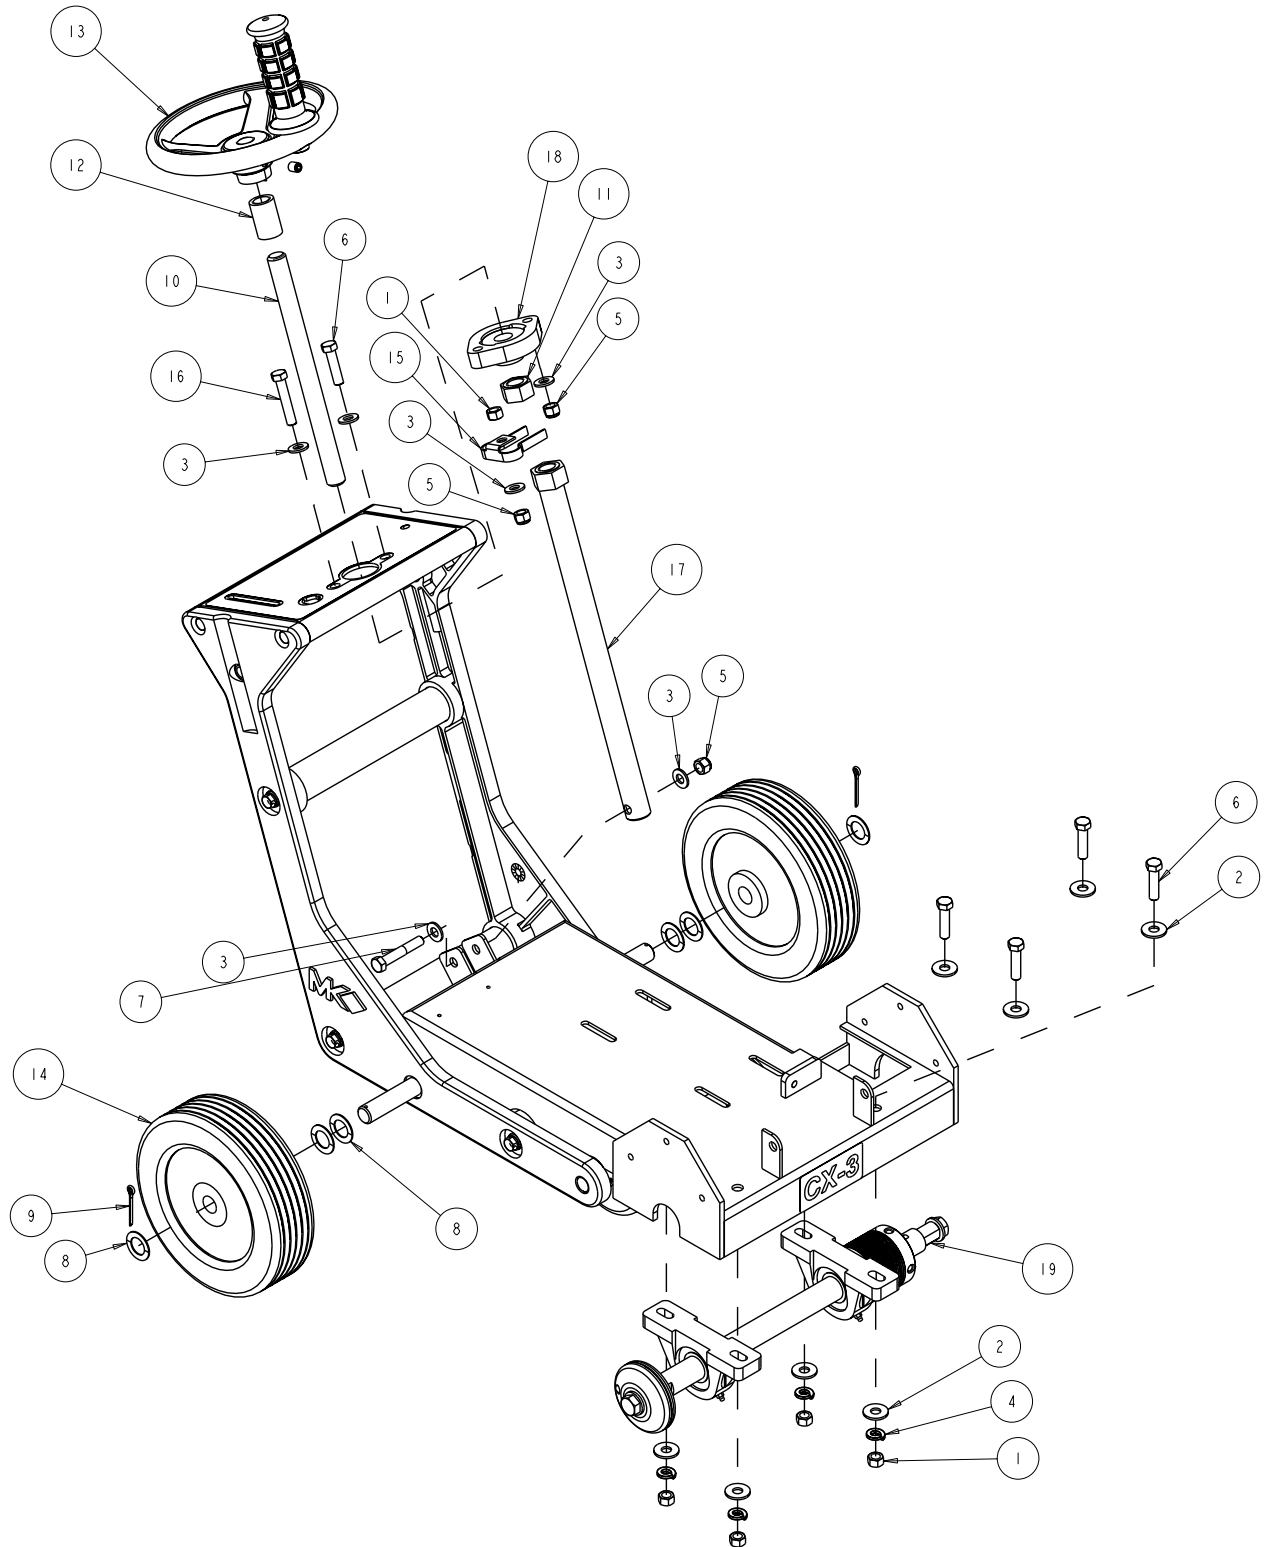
PARTS LIST: MK-CX3 LESS ENGINE - P/N 165974
